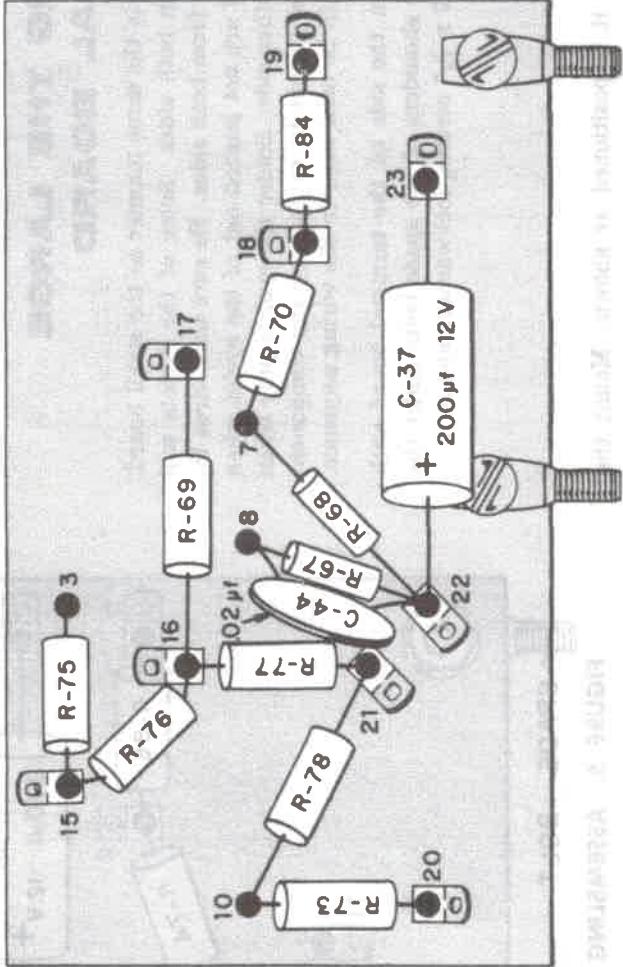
ASSEMBLING THE LARGE TERMINAL BOARD (OTHER SIDE)
